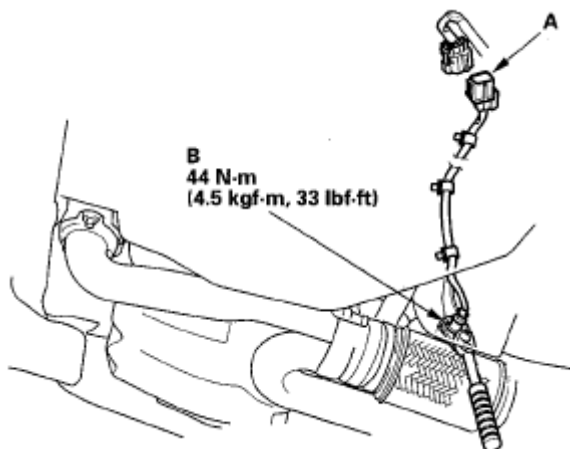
Identifying Rear Secondary HO2S 4P Connector And Rear Secondary HO2S With
